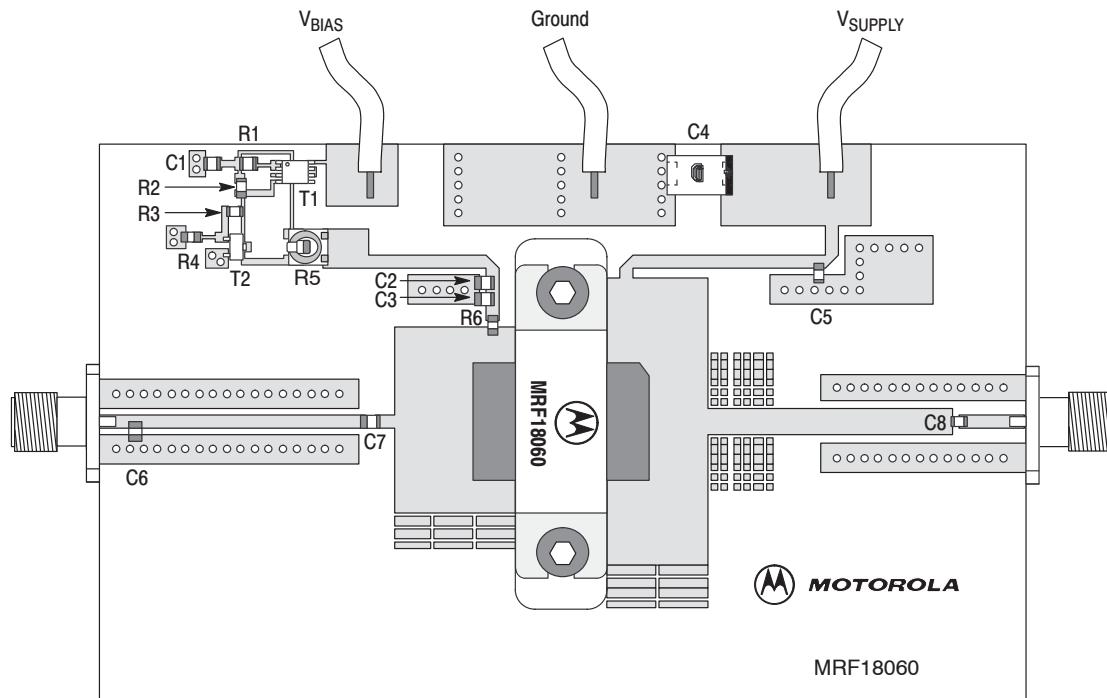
1930 – 1990 MHz Test Fixture Component Layout
